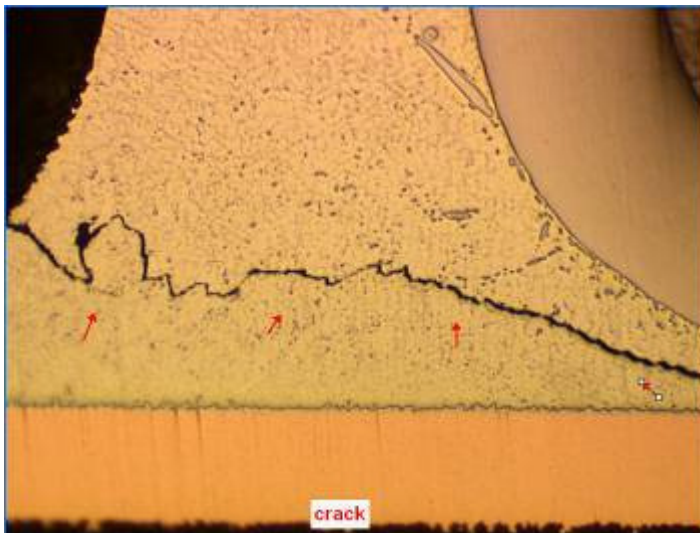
cross section, SN62, U61, right lead solder crack, 200x a
